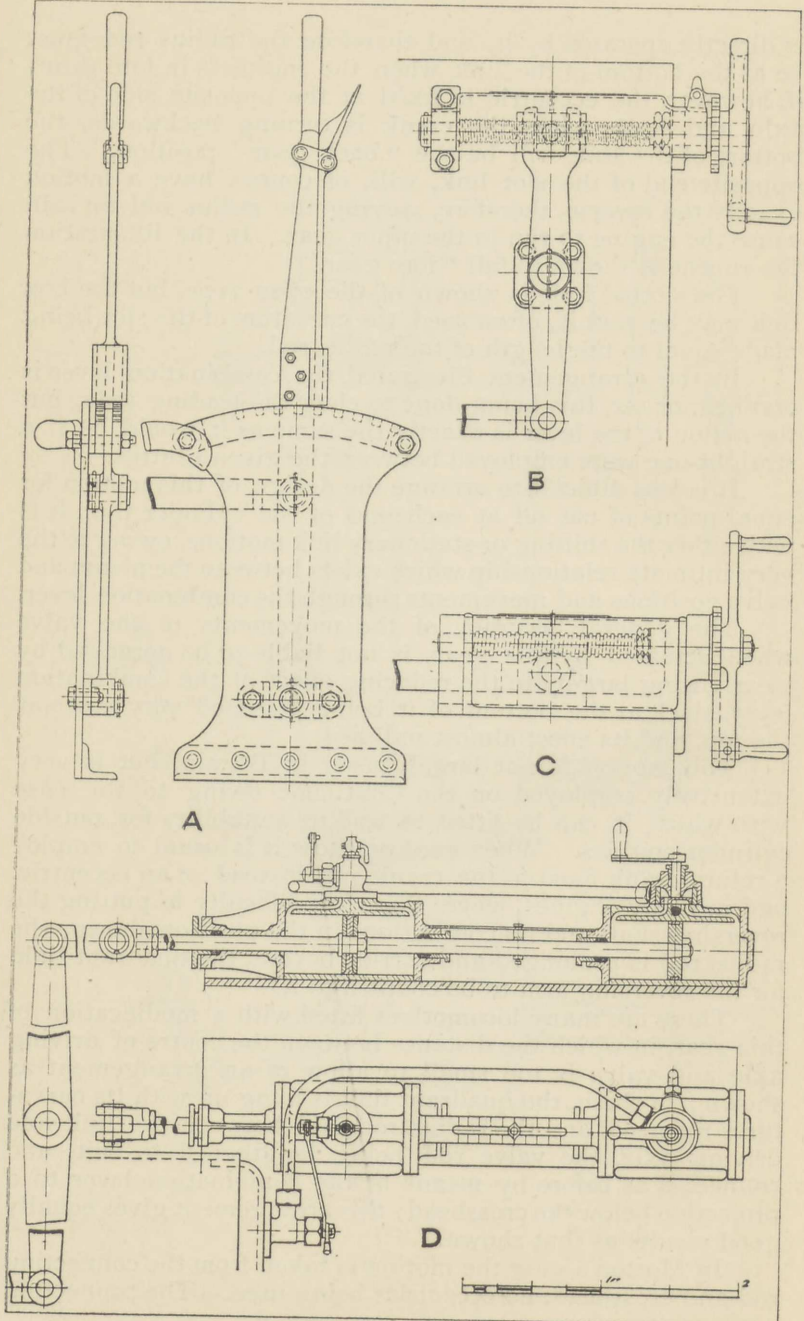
REVERSING GEAR ARRANGEMENTS.
